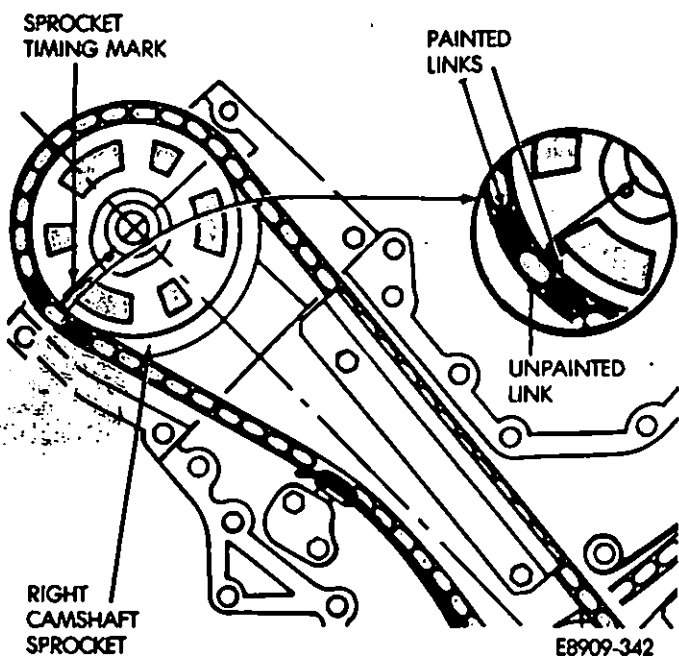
Right Camshaft Sprocket to Timing Chain Alignment
